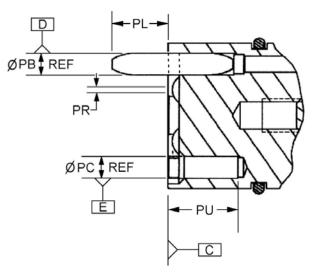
Plug interface dimensions, coupling nut fully retracted (section view A-A, see figure 5).
